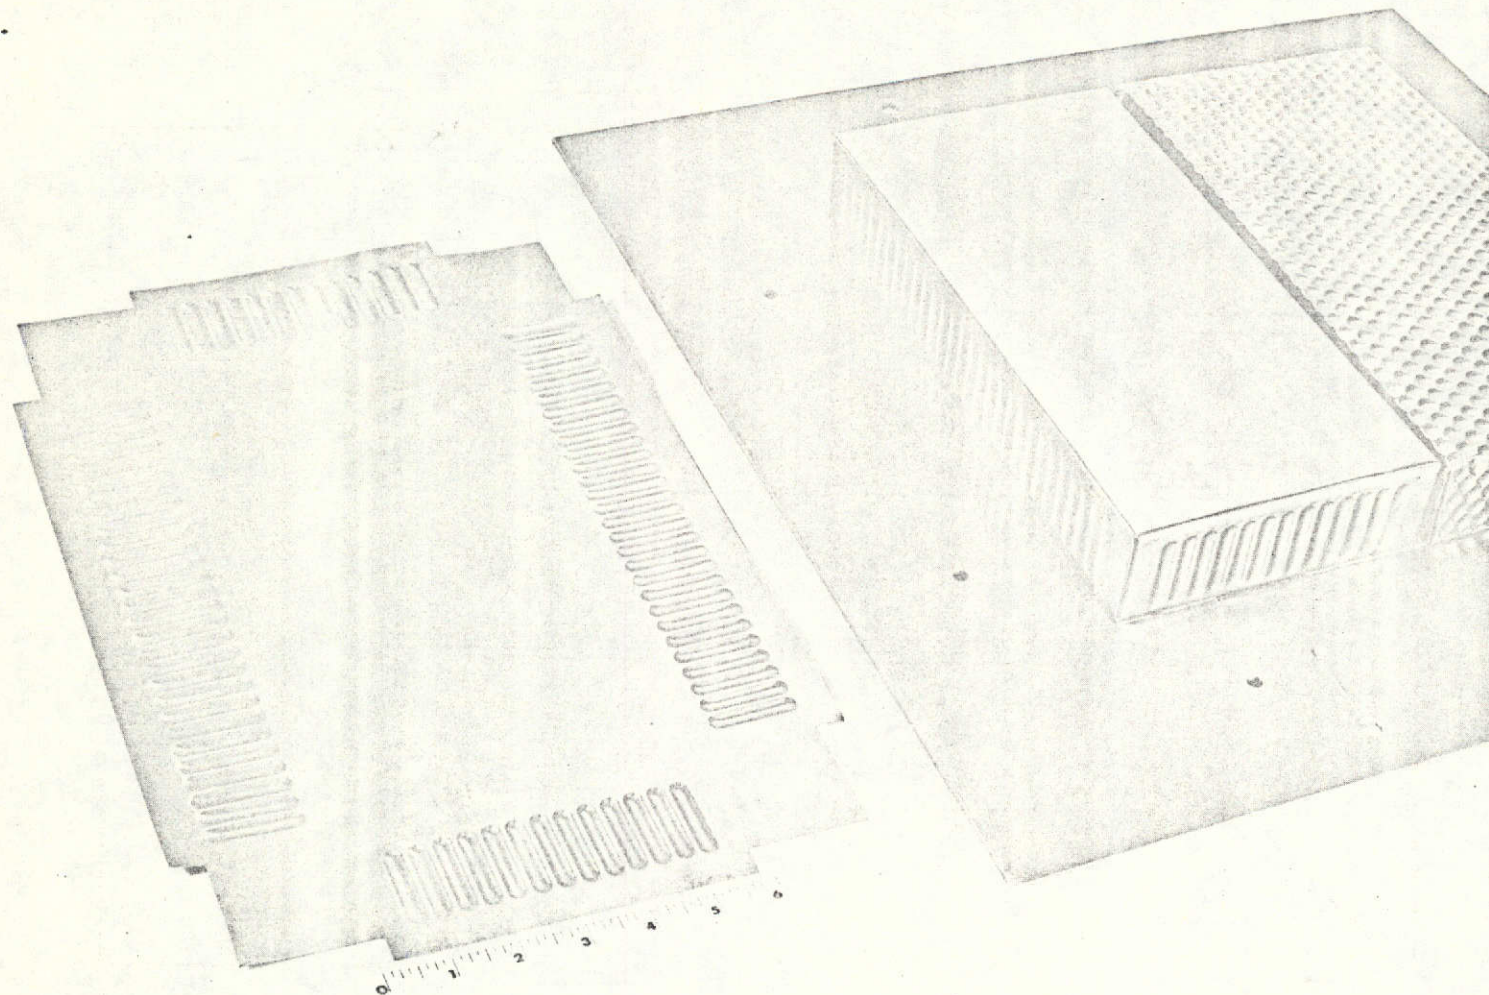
BEADED DESIGN FLAT LAYOUT AND FINISHED SPECIMEN
